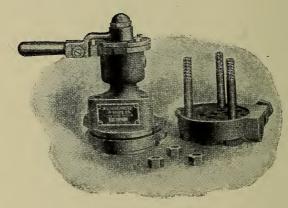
S-6 Independent Brake Valve Removed from Pipe Bracket.
